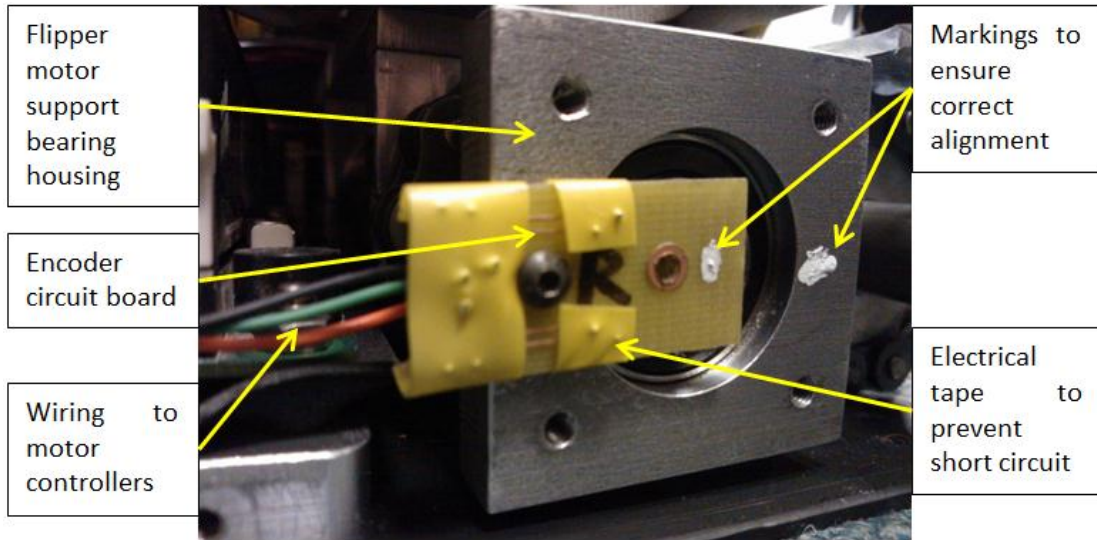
Encoder circuit mounted on flipper motor bearing housing.
